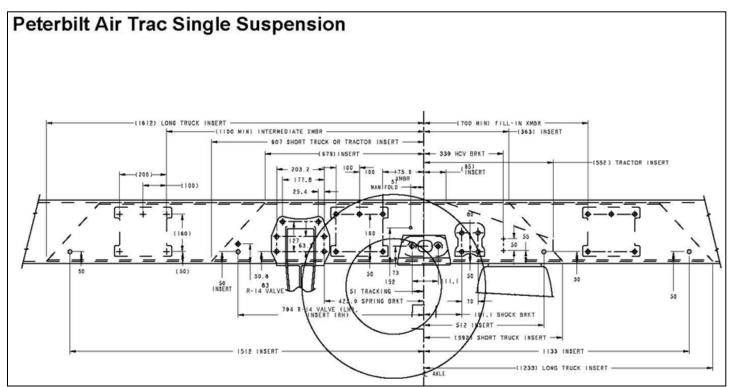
Peterbilt Air Trac Single Frame Drilling (Dimensions In Millimeters)
